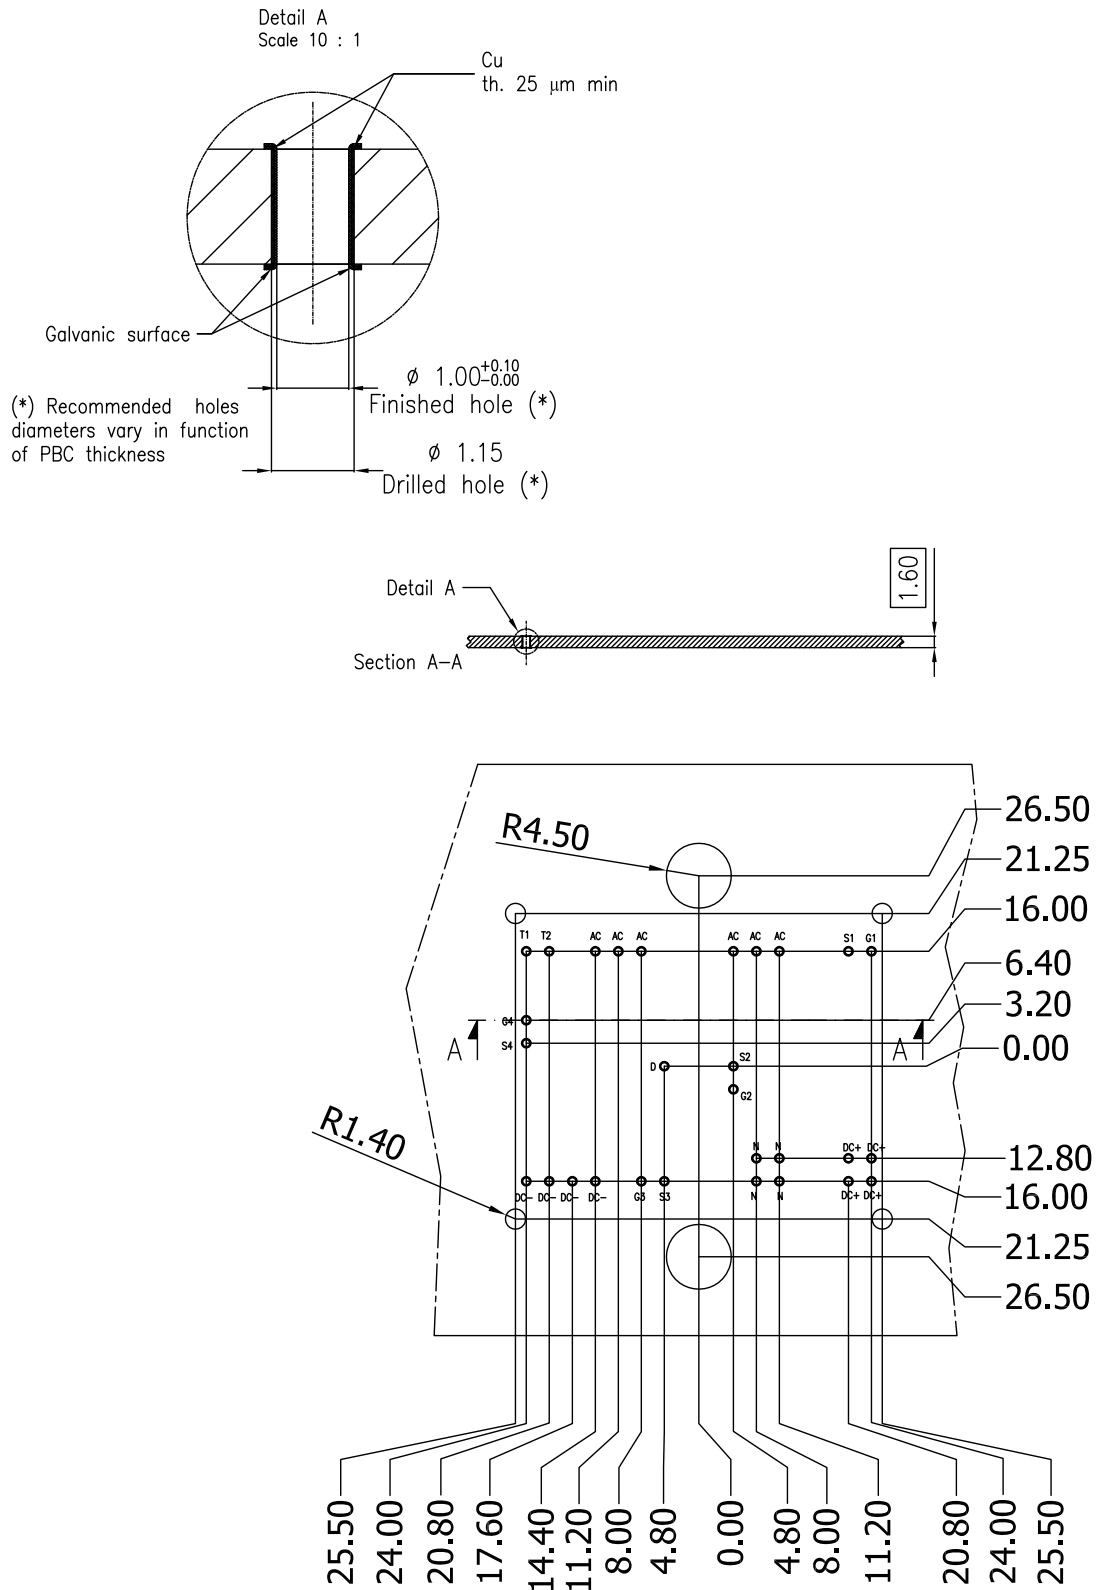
ACEPACK 2 3-level T-type press fit package outline (dimensions are in mm)
